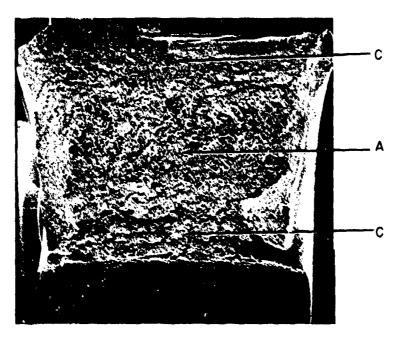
Fracture surface of an A-36 Charpy specimen tested at room temperature, 7x.
